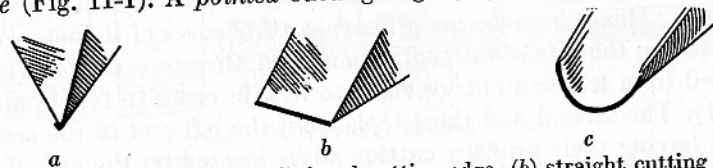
Cutting edges: (a) Pointed cutting edge, (b) straight cutting edge, (c) shaped cutting edge. (The Shell Oil Company)
